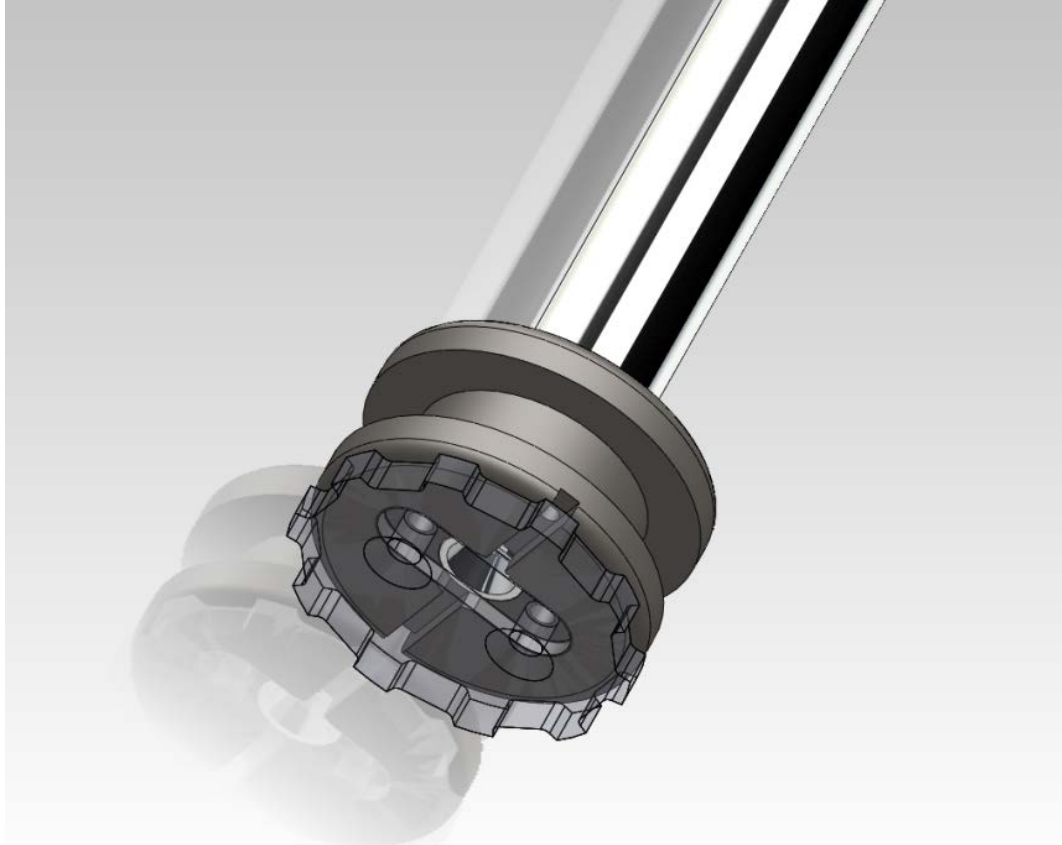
Piston Design with Wire Seal Design and Plastic Wear Ring
